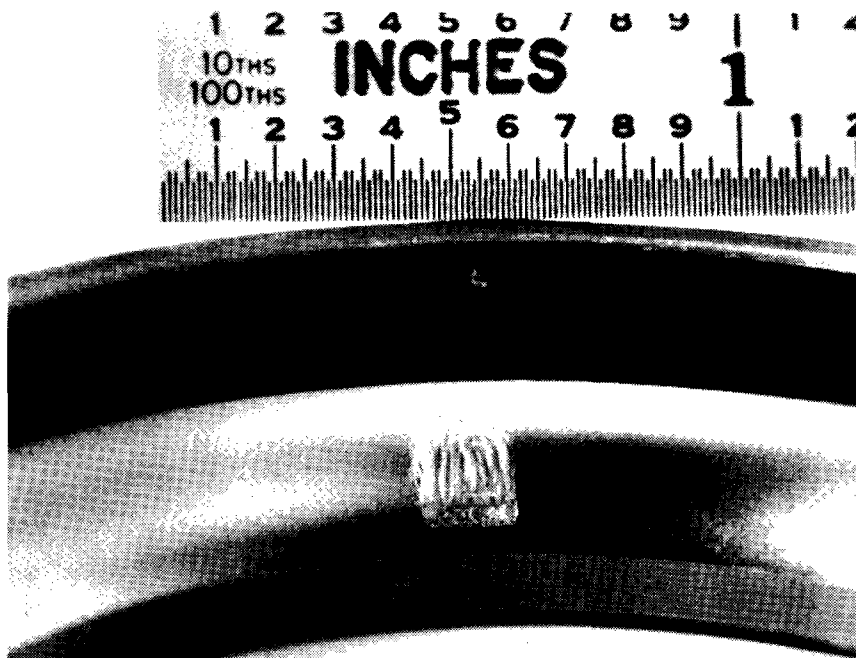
42-Degree Gearbox -143 Bearing Outer Race C/D,
